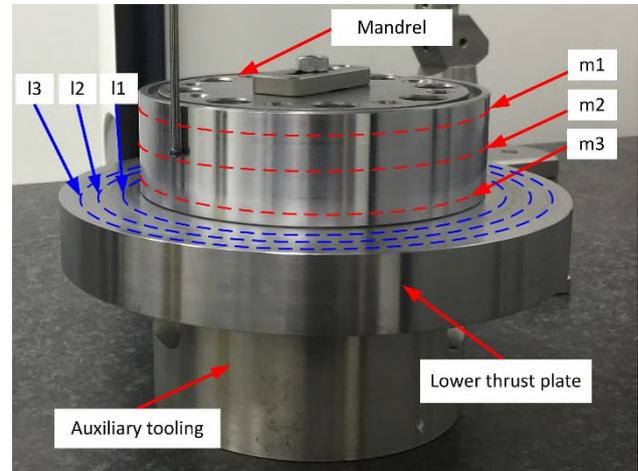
Geometry error measurement of lower thrust plate and mandrel
